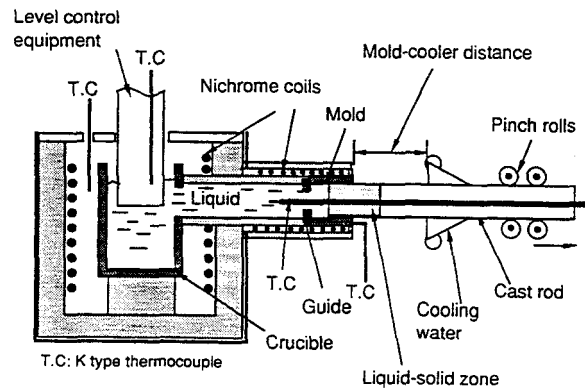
Schematic layout of the horizontal OCC equipment.
